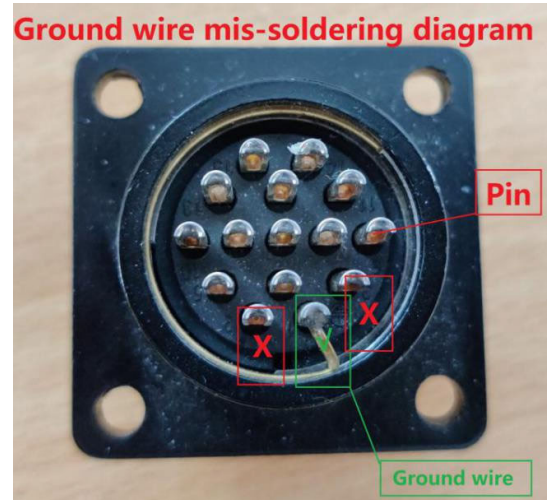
Diagram of staggered welding of ground wire.
